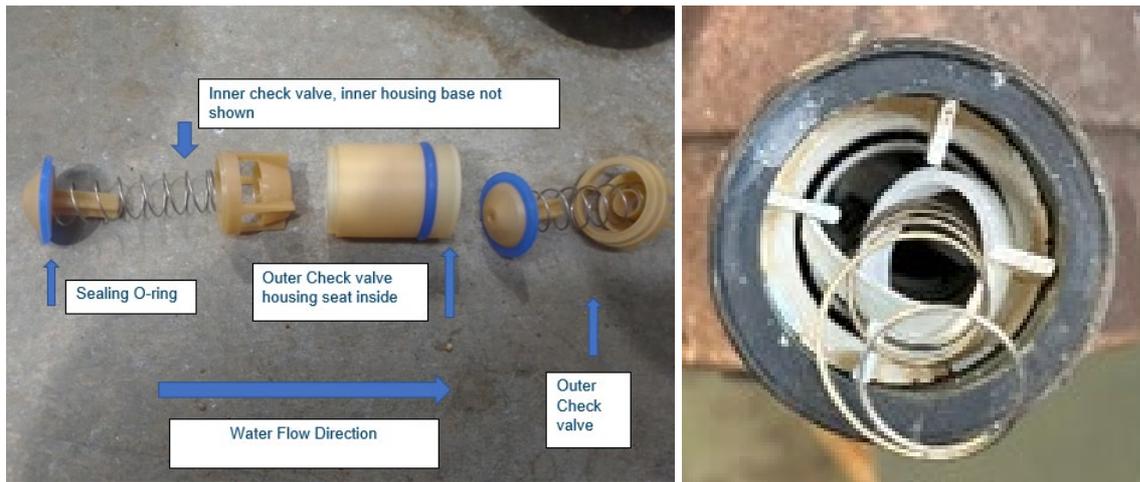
DCV Exploded View Showing both Valves and Housing (Left Image) and Example of Failed DCV (Right Image)
